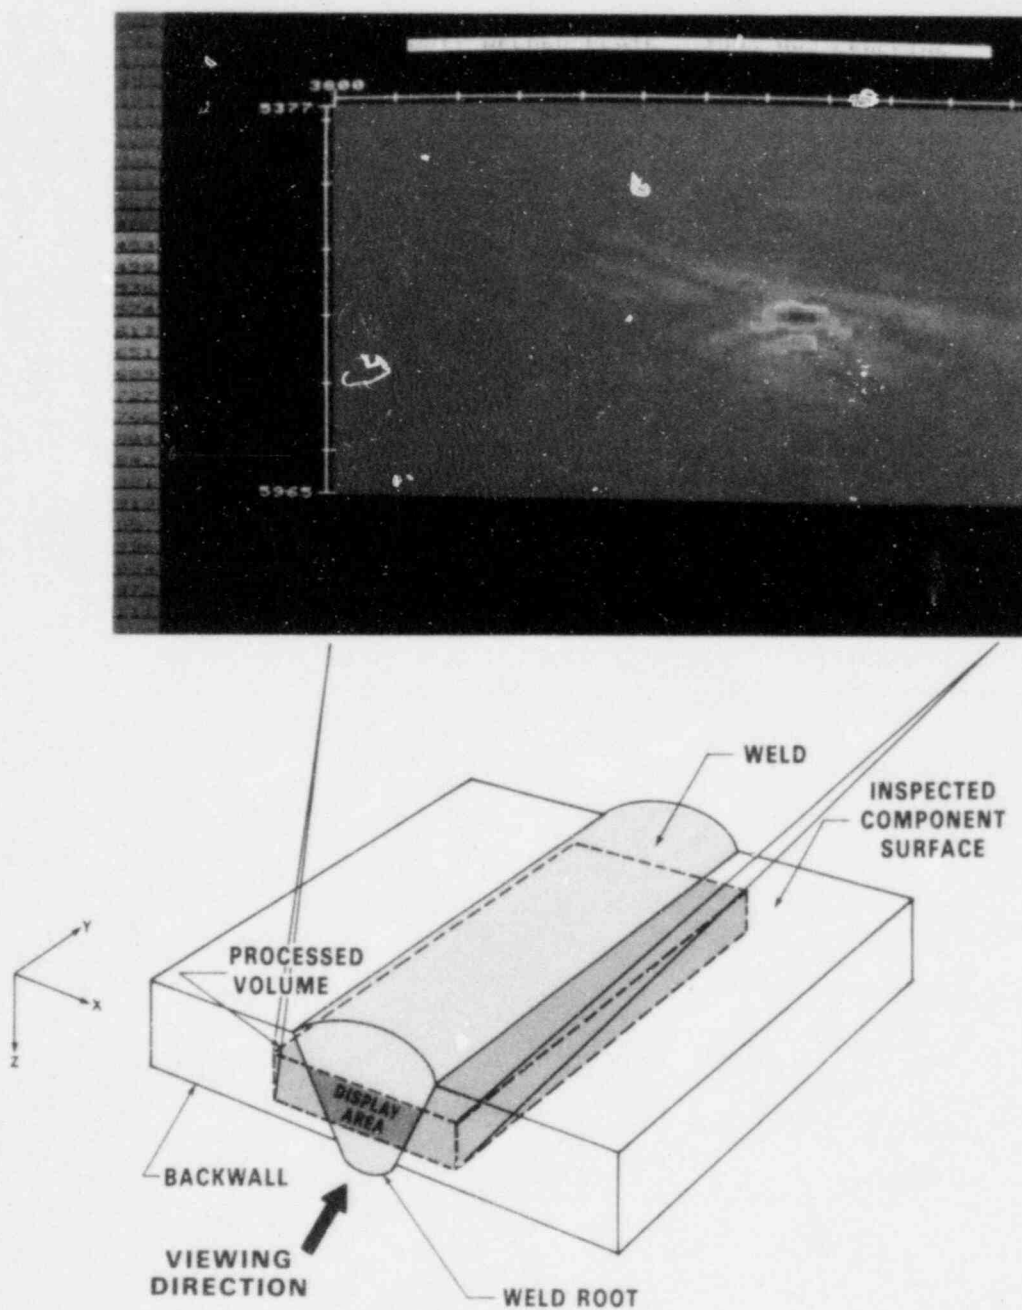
BUTT-WELDED CARBON STEEL PLATE SPECIMEN - HEAT-AFFECTED ZONE-TO-BASE METAL CRACKING (B-Scan View Transverse to Weld)
